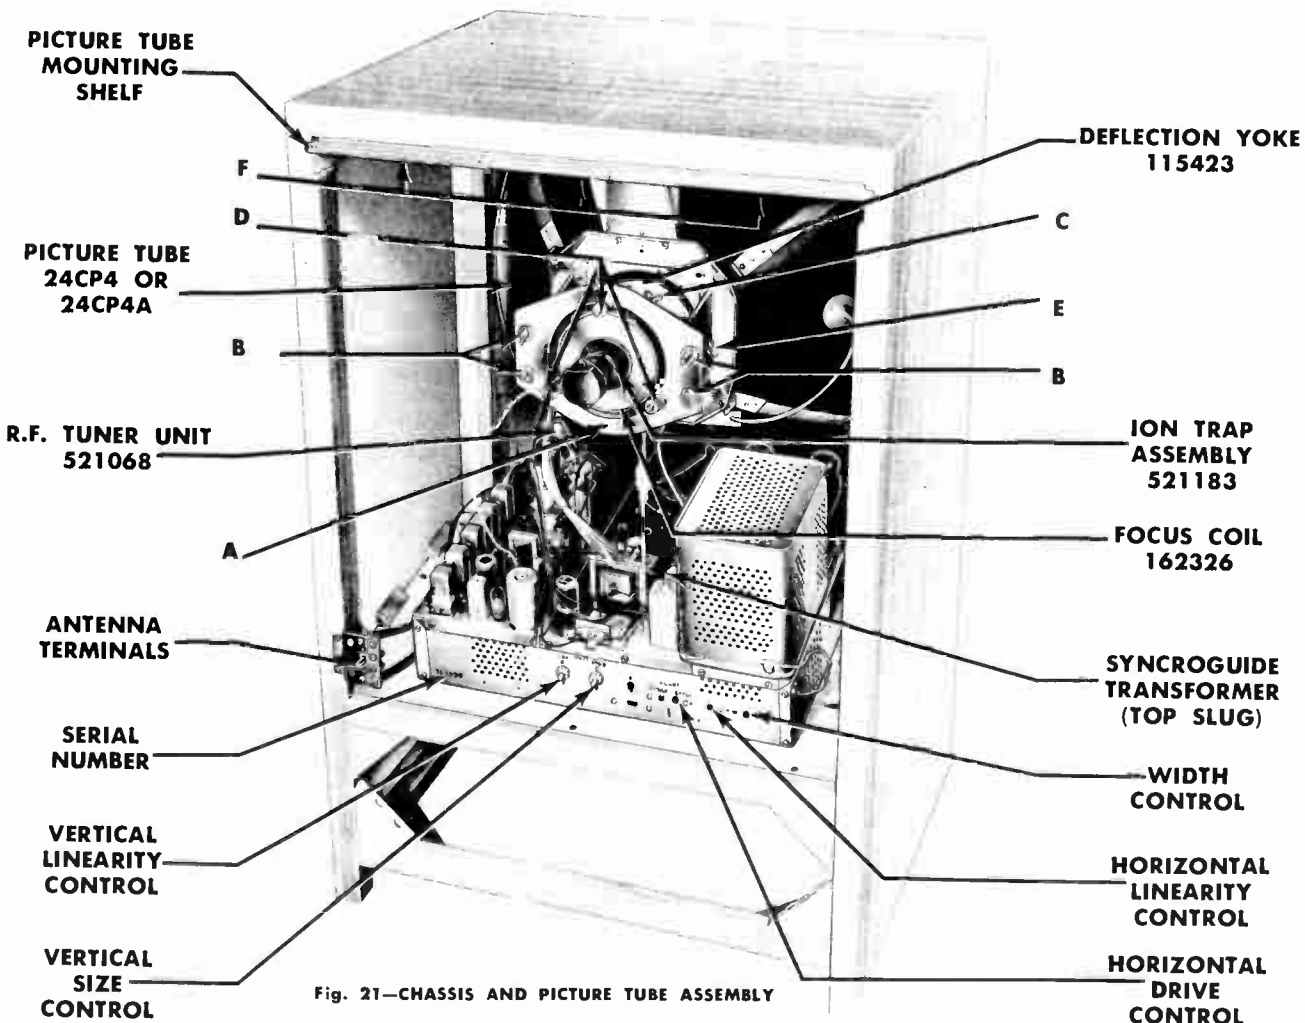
CHASSIS AND PICTURE TUBE ASSEMBLY
